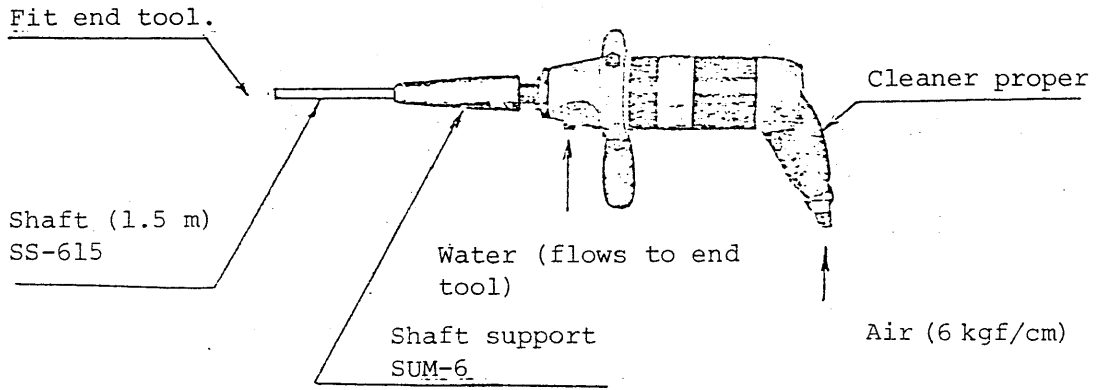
Cleaner Proper, Shaft Support, and Shaft
